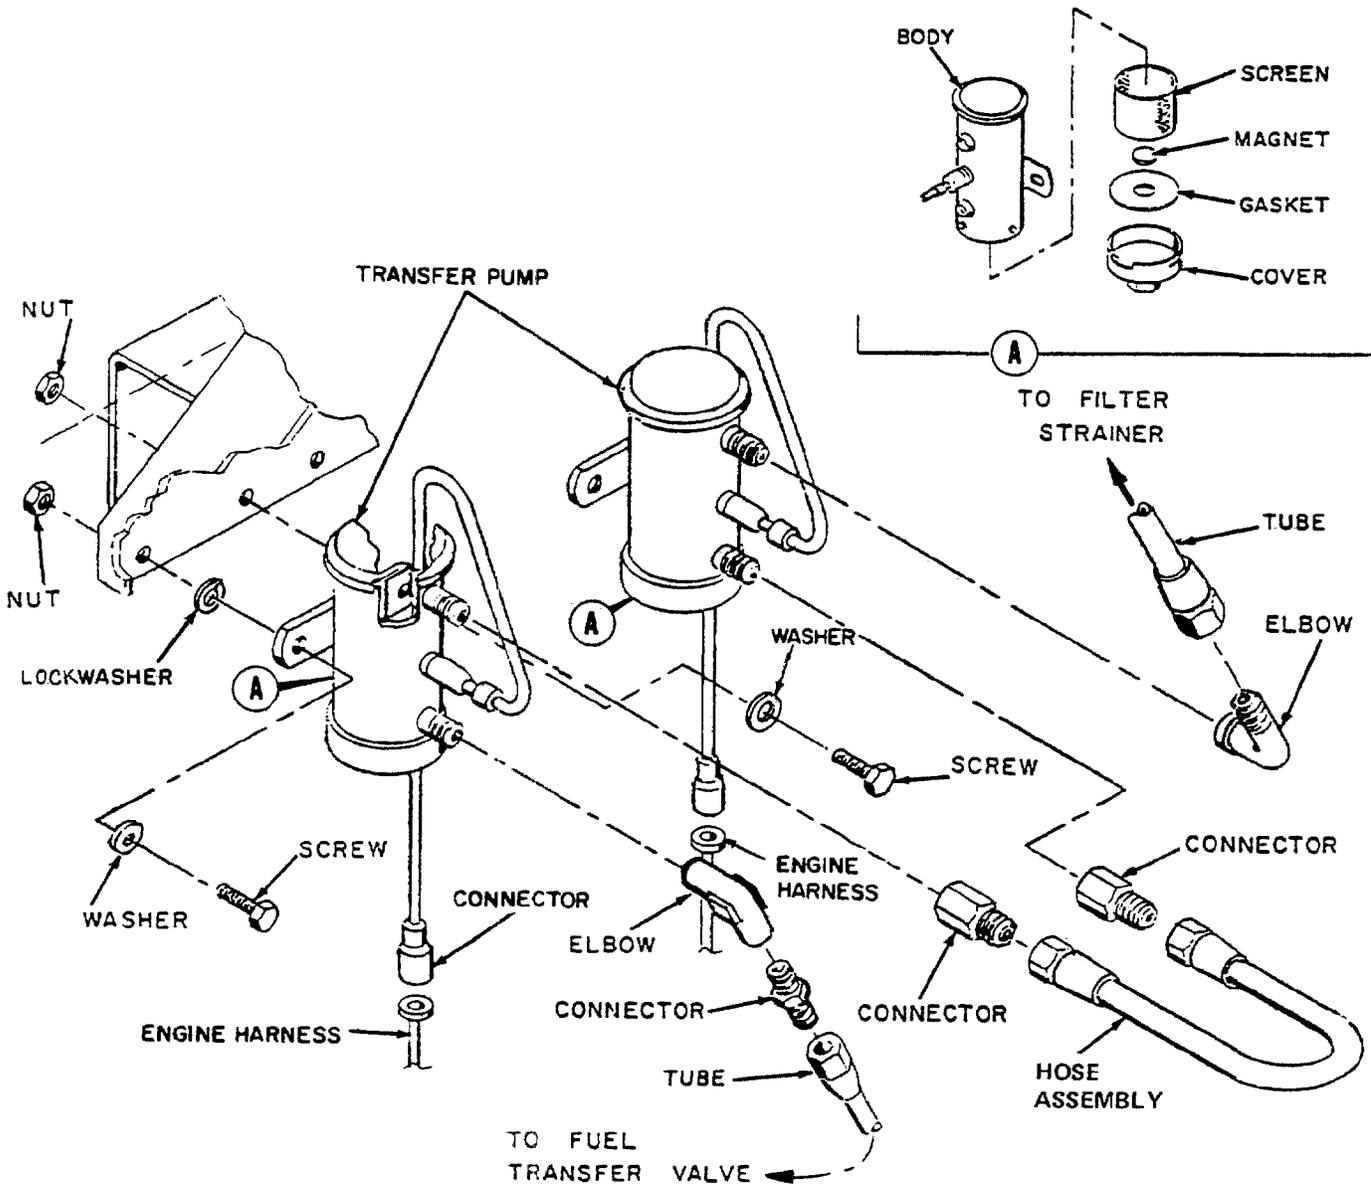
Electric Fuel Transfer Pumps, Exploded View
